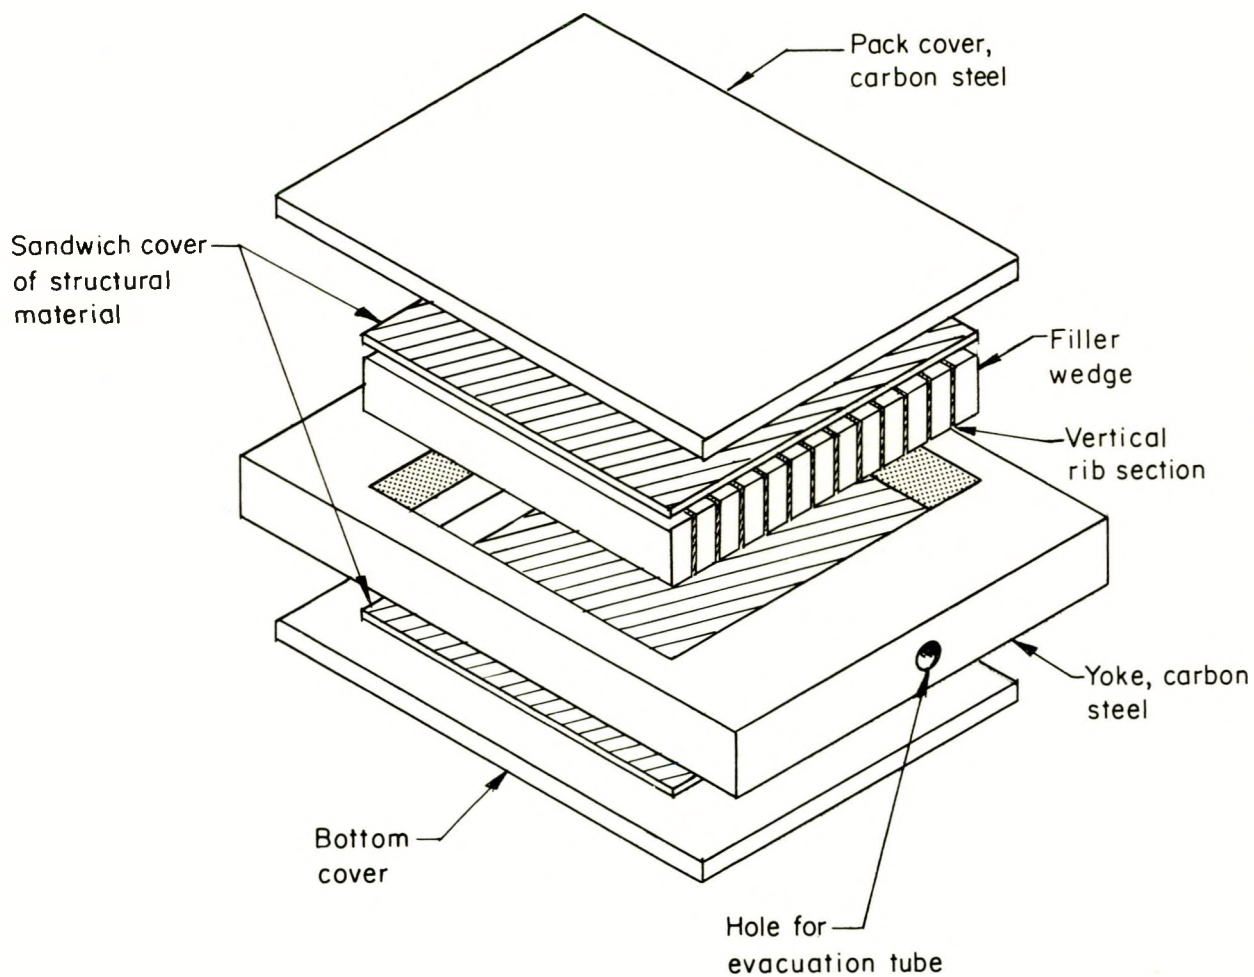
EXPLODED VIEW OF PACK ASSEMBLY FOR PRODUCING ROLL-WELDED VERTICAL-RIB SANDWICH PANELS FROM PH 14-8 Mo (Ref. 74)
